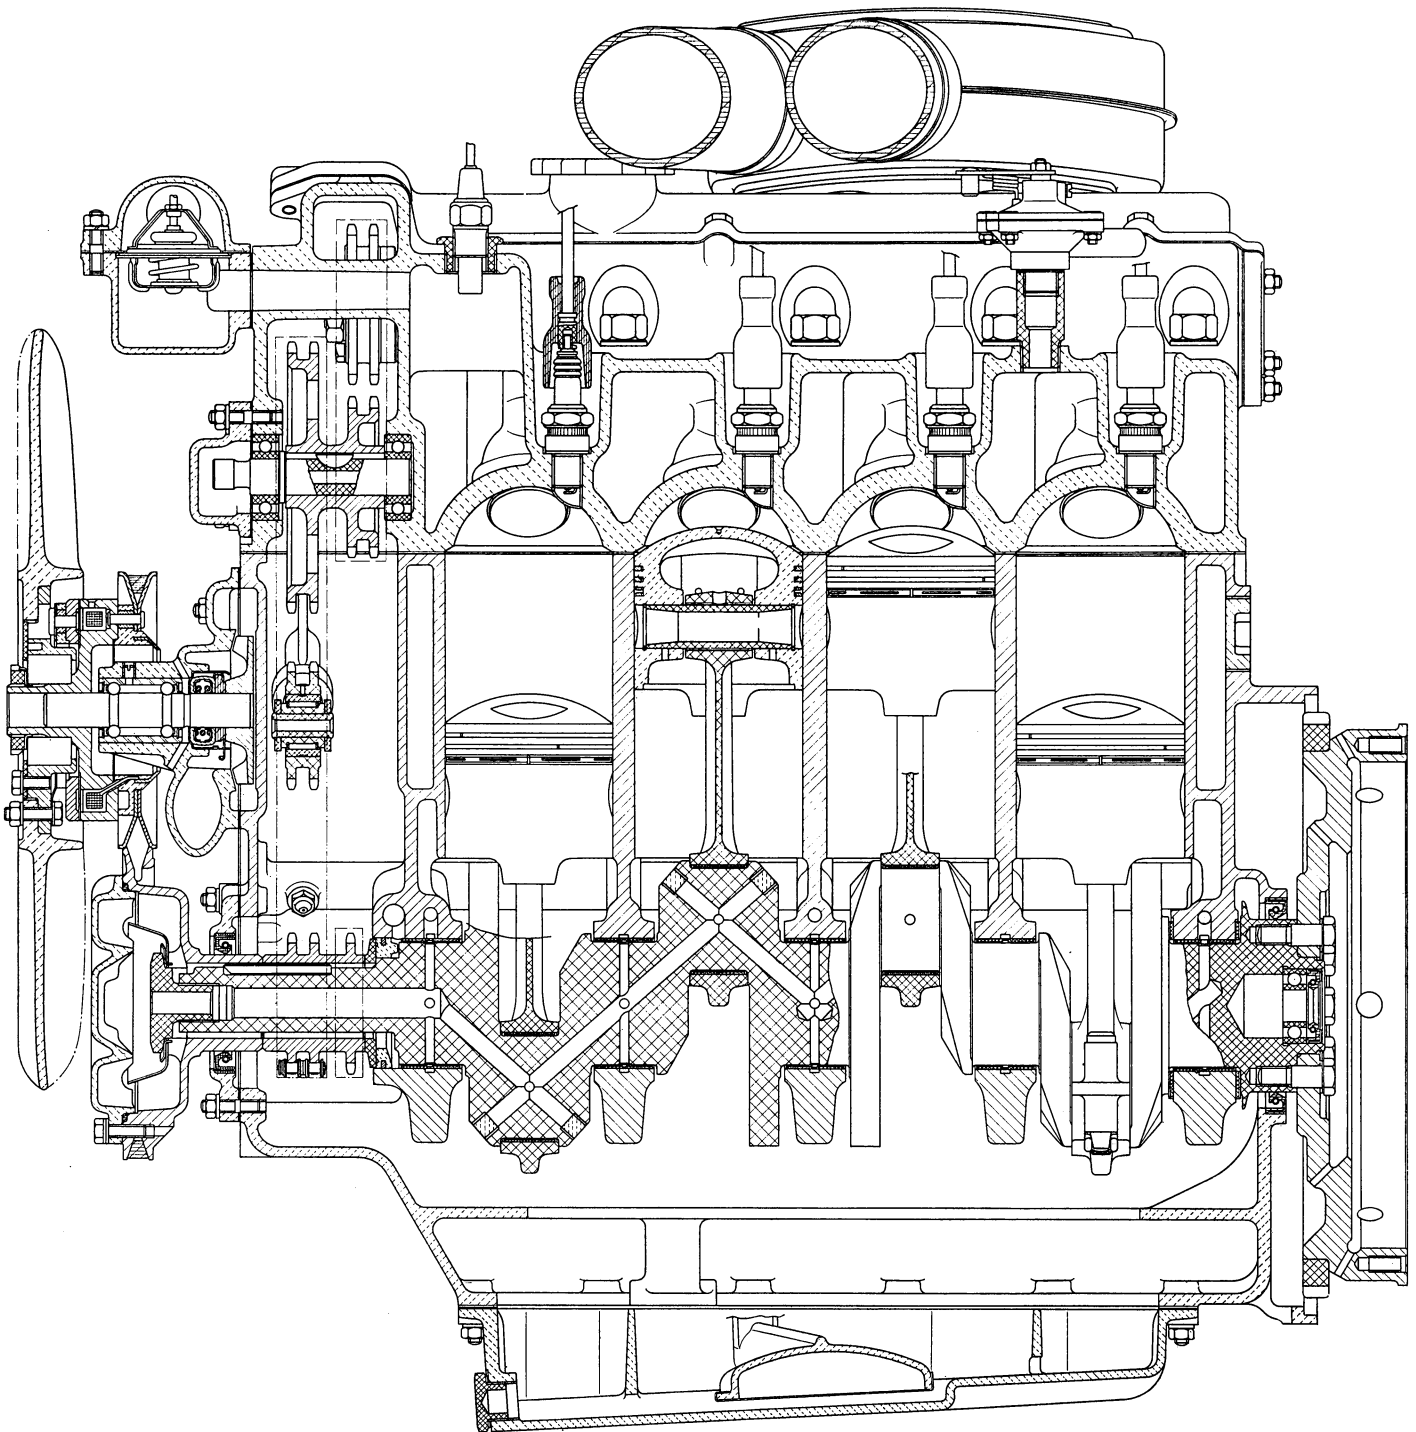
Side sectional view of engine 118 B.000 across cylinders.
